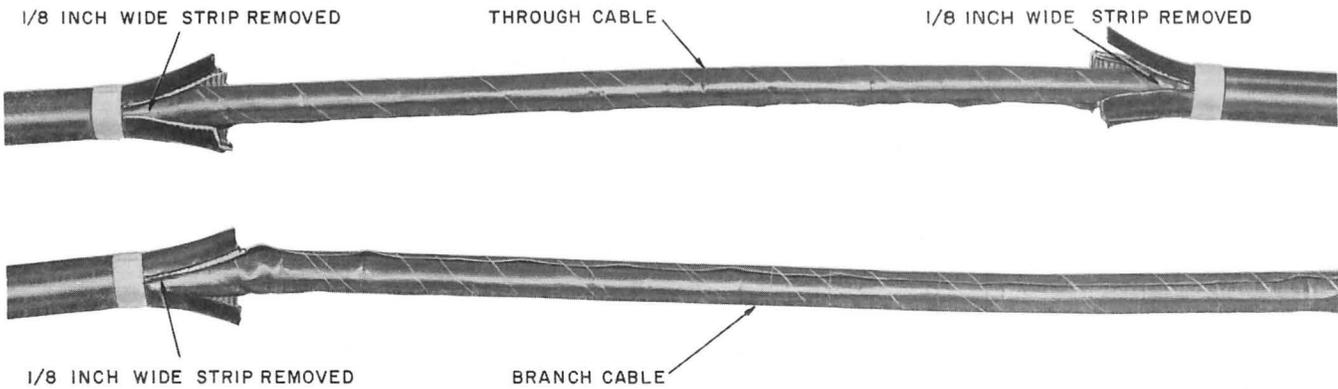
1/8-Inch Wide Strip Removed From Cable
